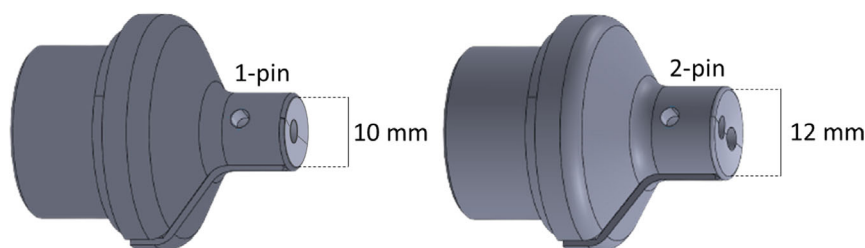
CAD model of welding tool with 1-pin hole and 2-pin hole.
